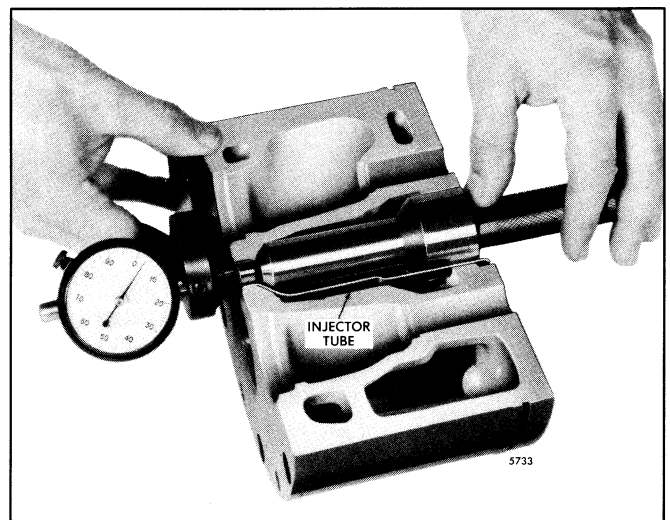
Checking Bevel Seat with Gage J 25561 and Dial J 22273
